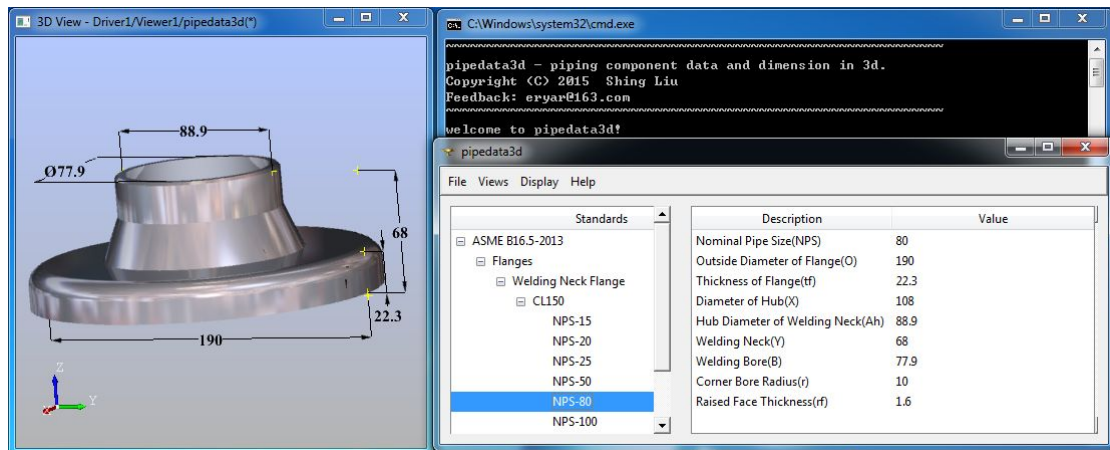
Welding Neck Flange in pipedata3d
